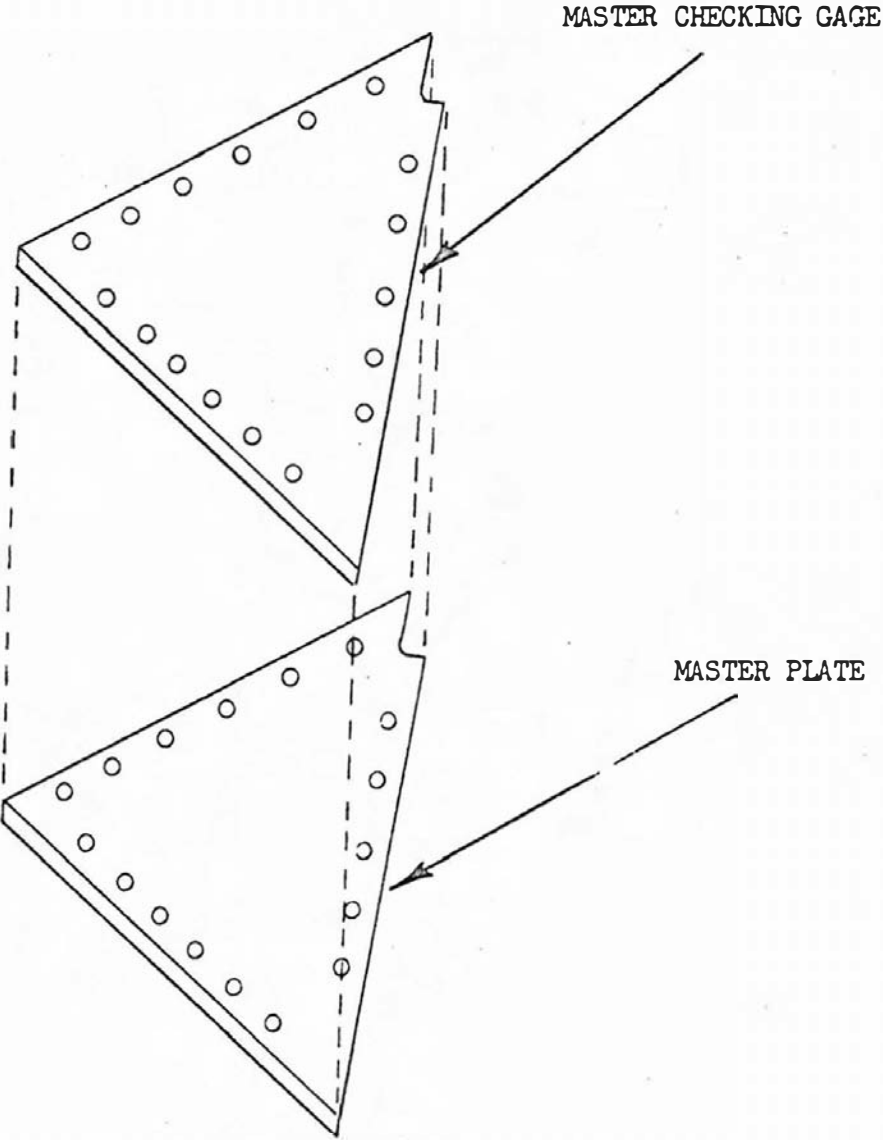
45. Typical Heatshield Master Checking Gage and Master Plate
